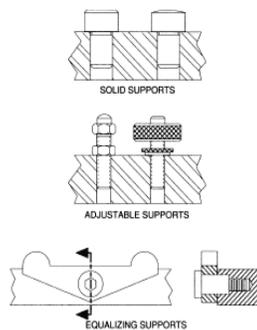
Solid, adjustable, and equalizing supports locate a workpiece from a flat surface.
